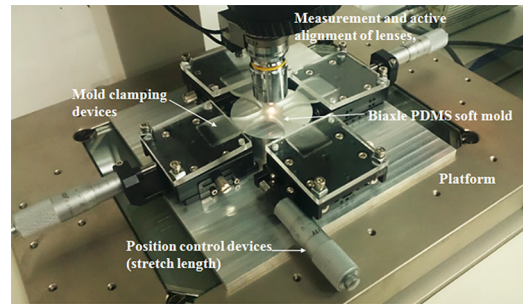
Seat of four-axis embossing molding of a multi-axis dynamic transfer system.
